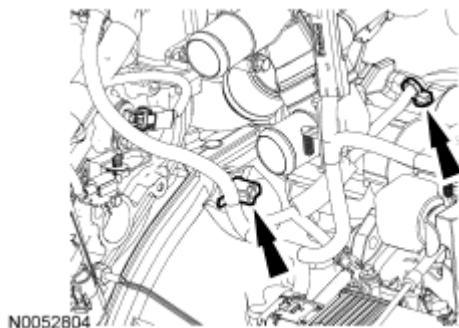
Identifying Wiring Harness Fasteners & Torque Converter Housing Stud Bolt
